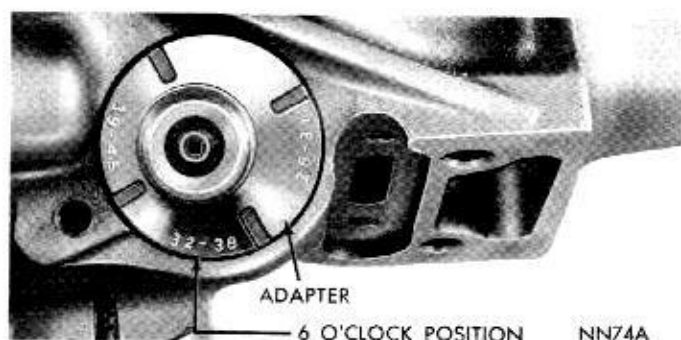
Speedometer Pinion and Adapter—Installed (Retainer Removed for View)
